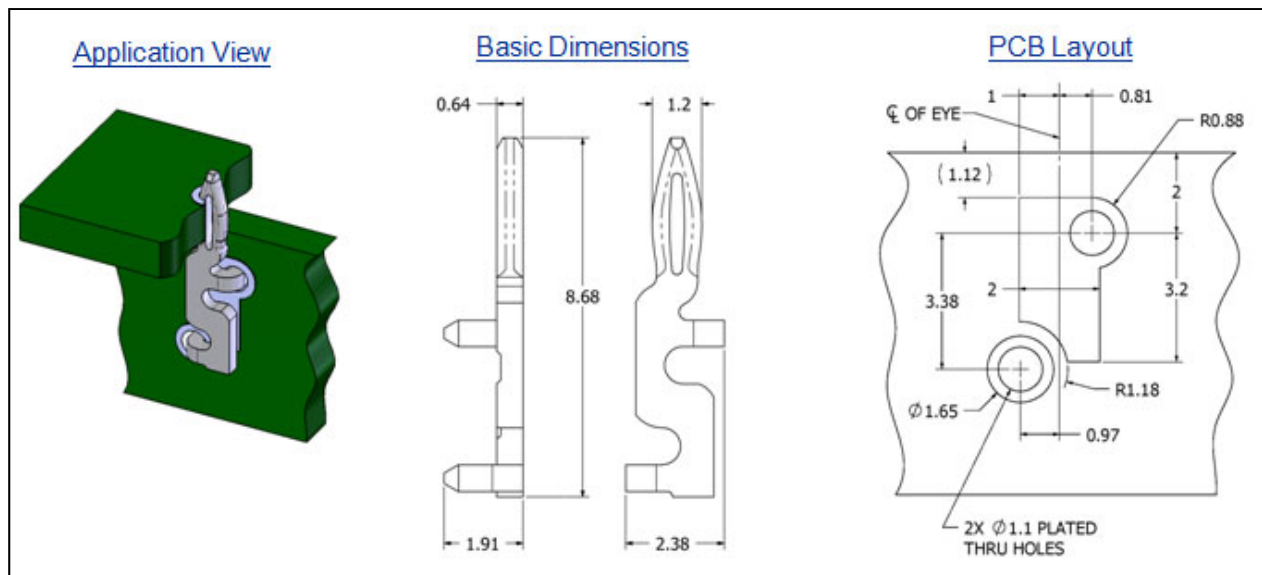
SMT Card-Edge Interconnect Dimensions and PCB Layout Parameters
